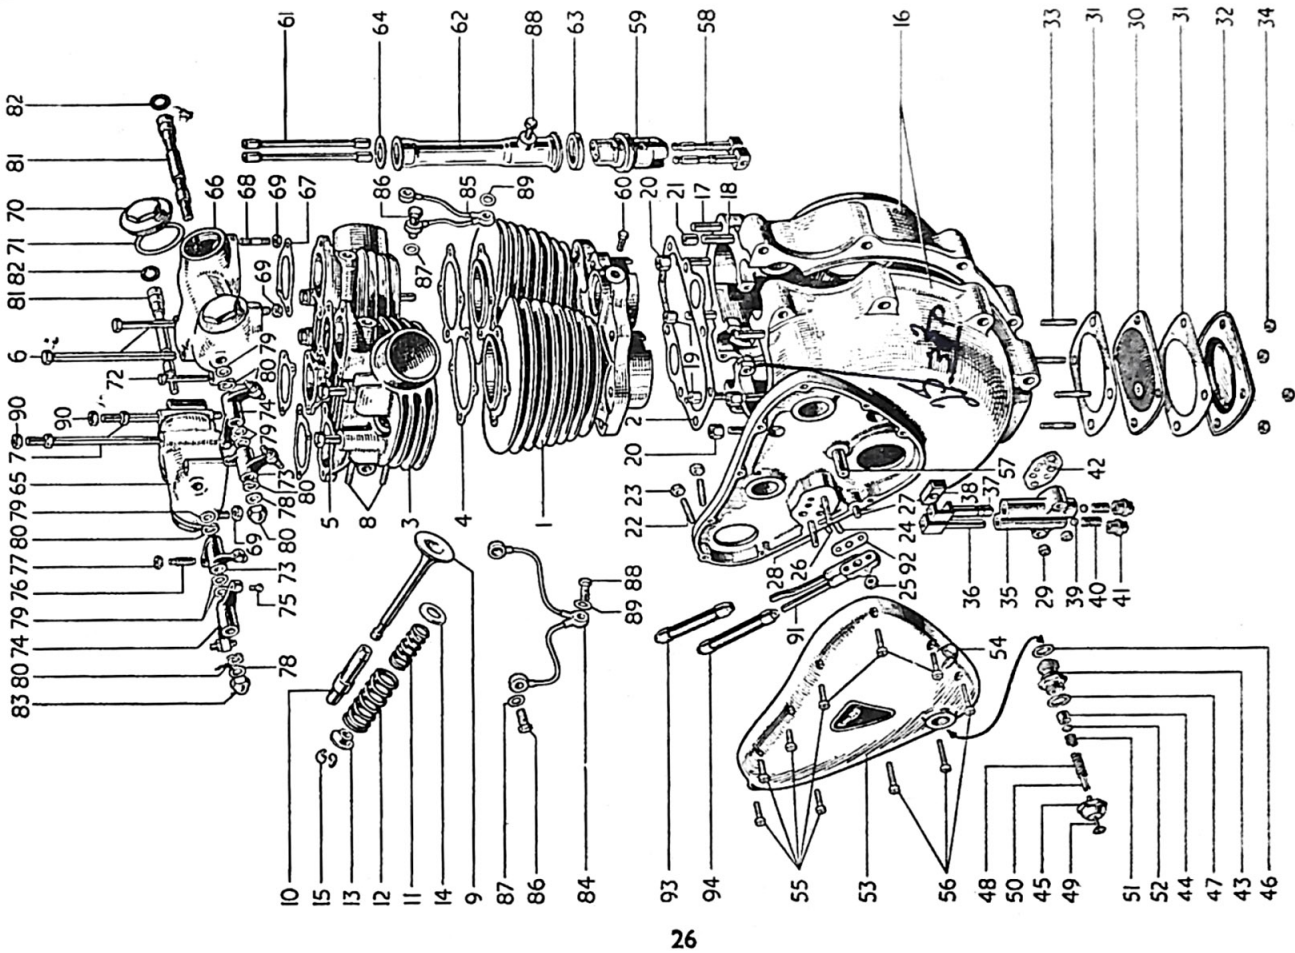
CRANKCASE, CYLINDER BLOCK, CYLINDER HEAD, etc.
